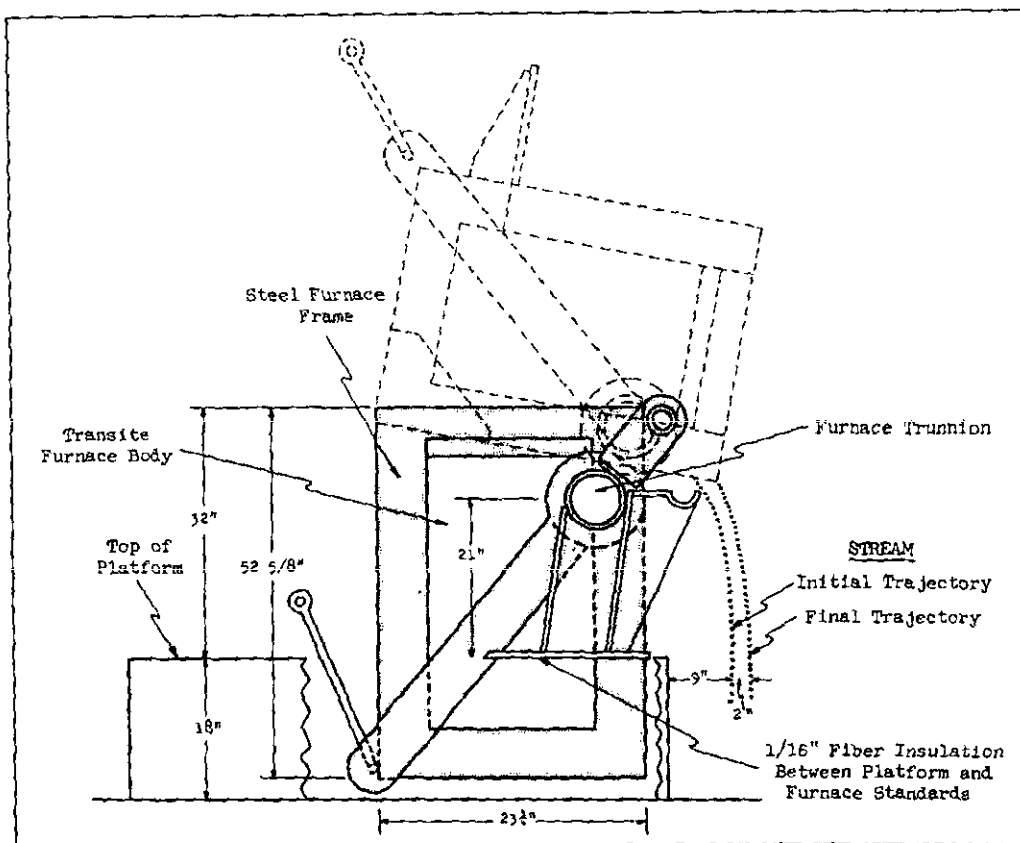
Side View of 100 kw Air-Melt Furnace Showing Pouring Arrangement
